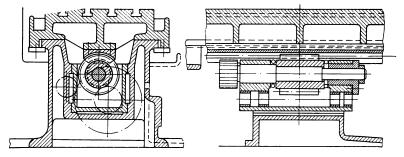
Worm and rack table-feed drive in a planer-type milling machine
